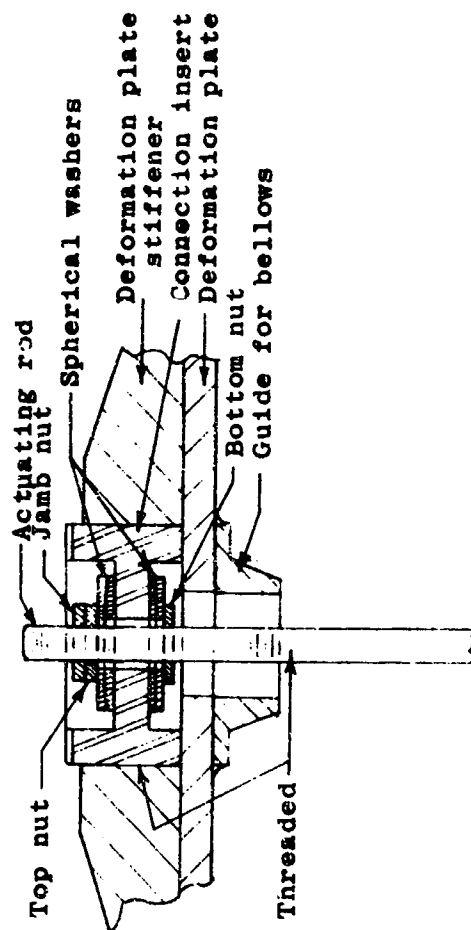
SKETCH OF CONNECTION BETWEEN DEFORMATION PLATE AND ACTUATING ROD
